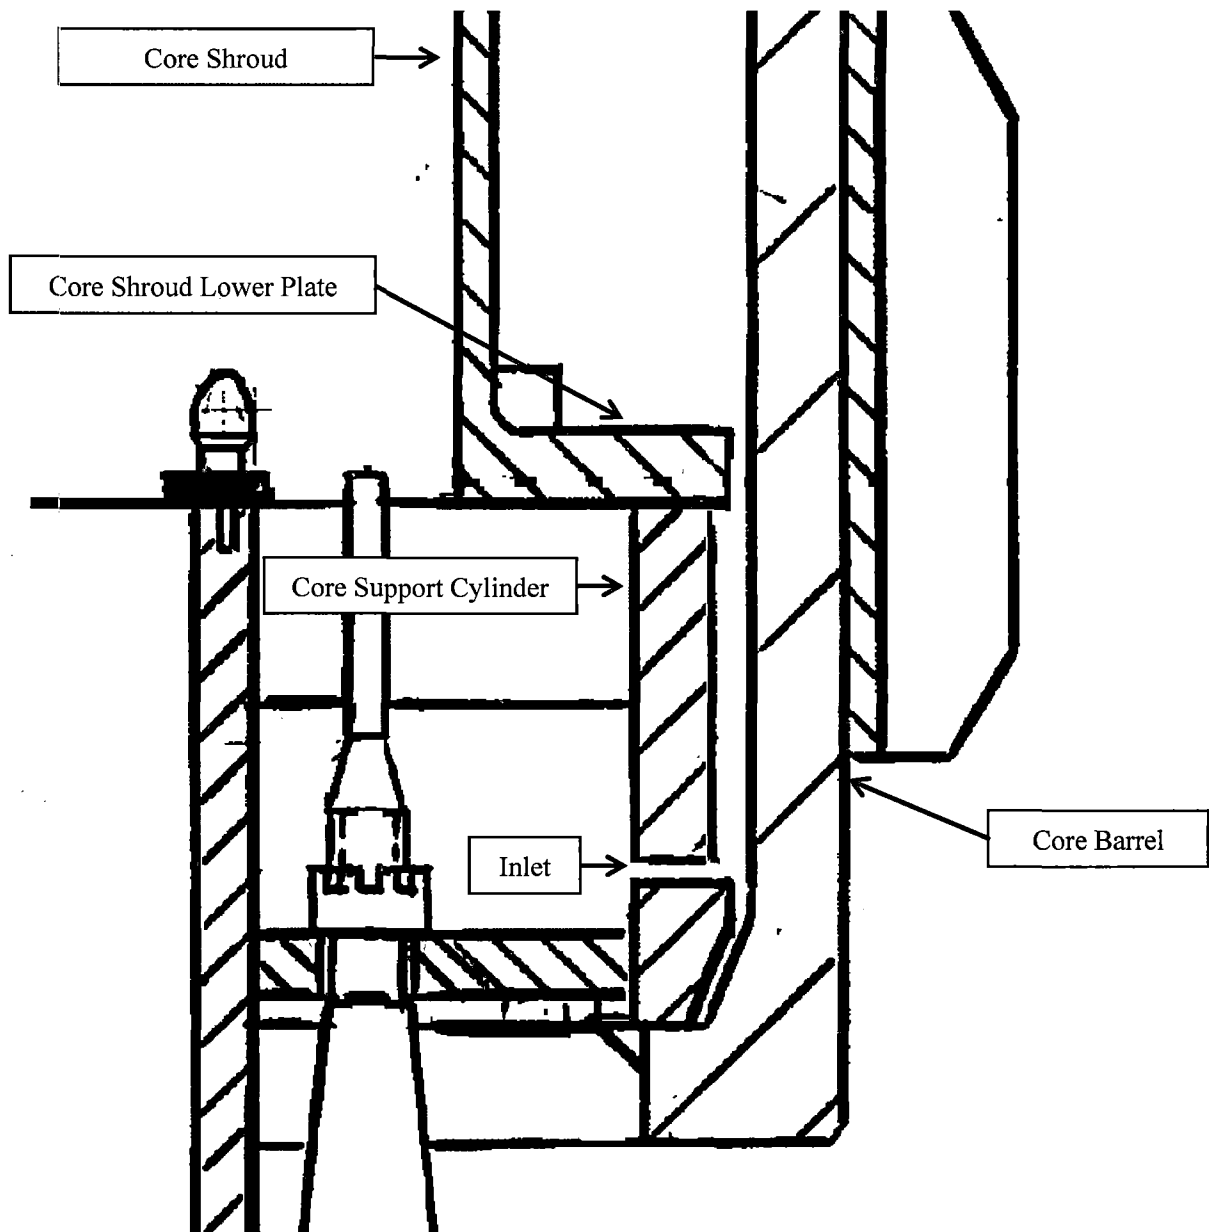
Combustion Engineering Core Shroud Inlet with Holes in the Core Support Cylinder
